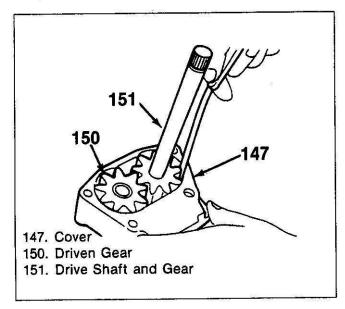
Checking Oil Pump Gear-to-Cover Clearance
